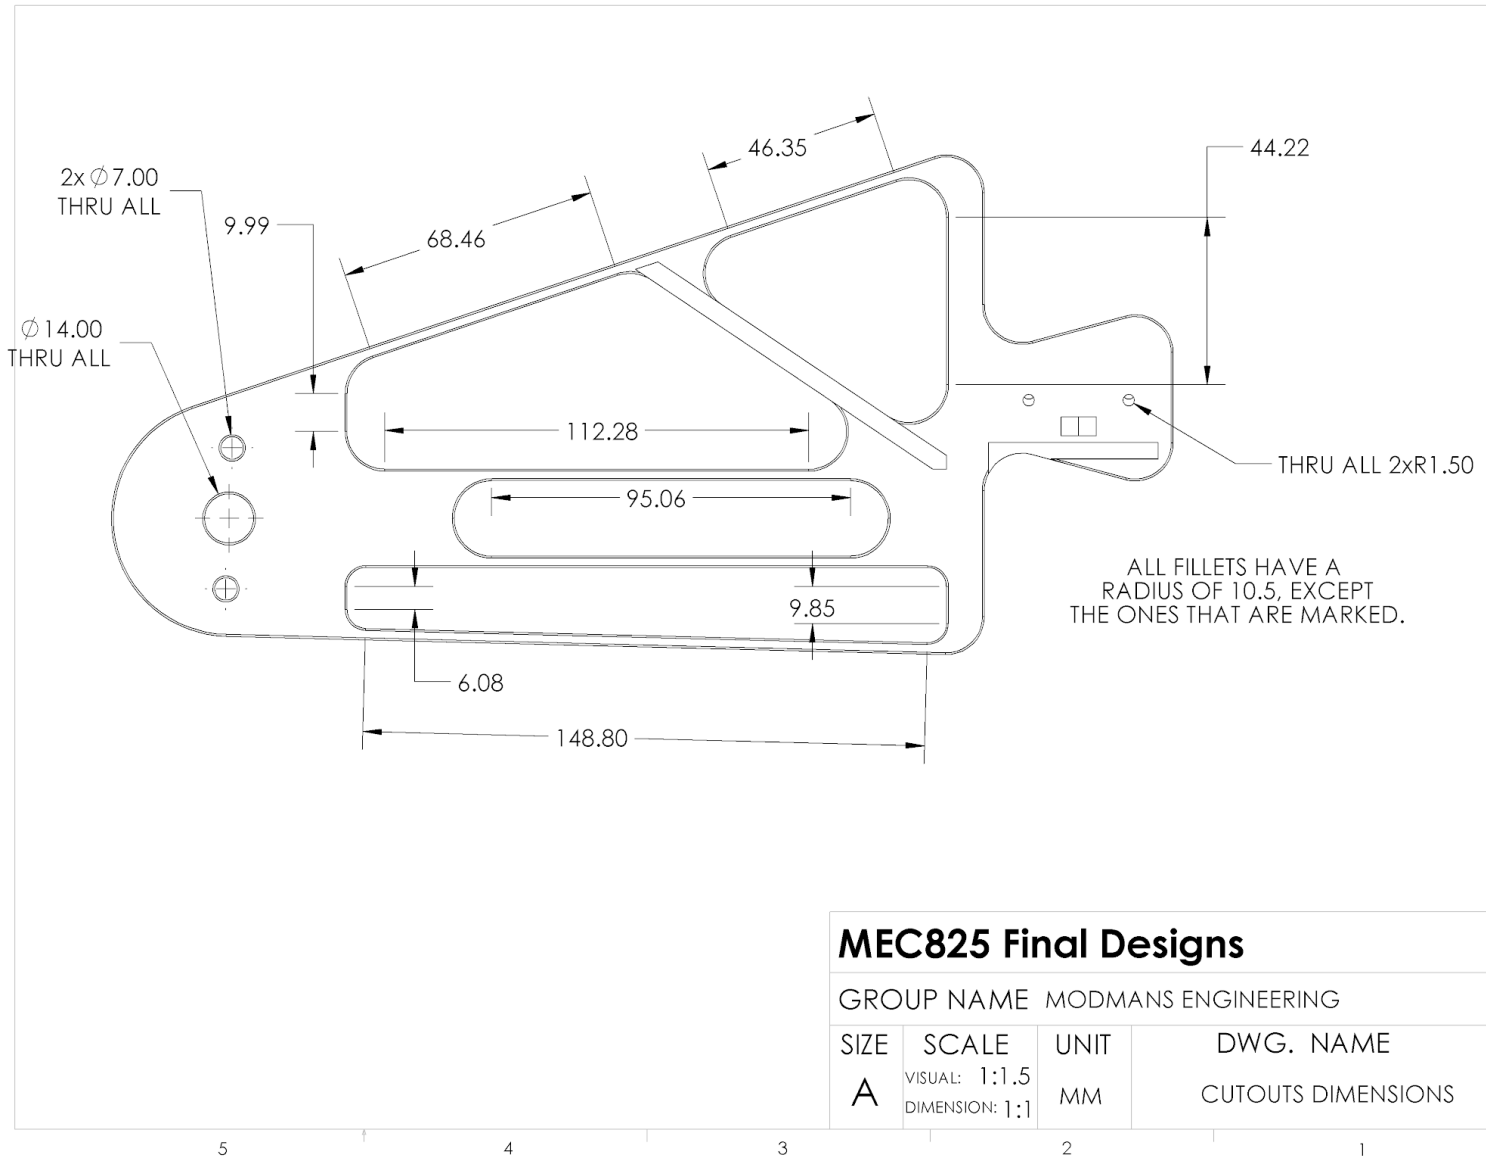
Wing Front Bottom Left Cutout Dimensions
